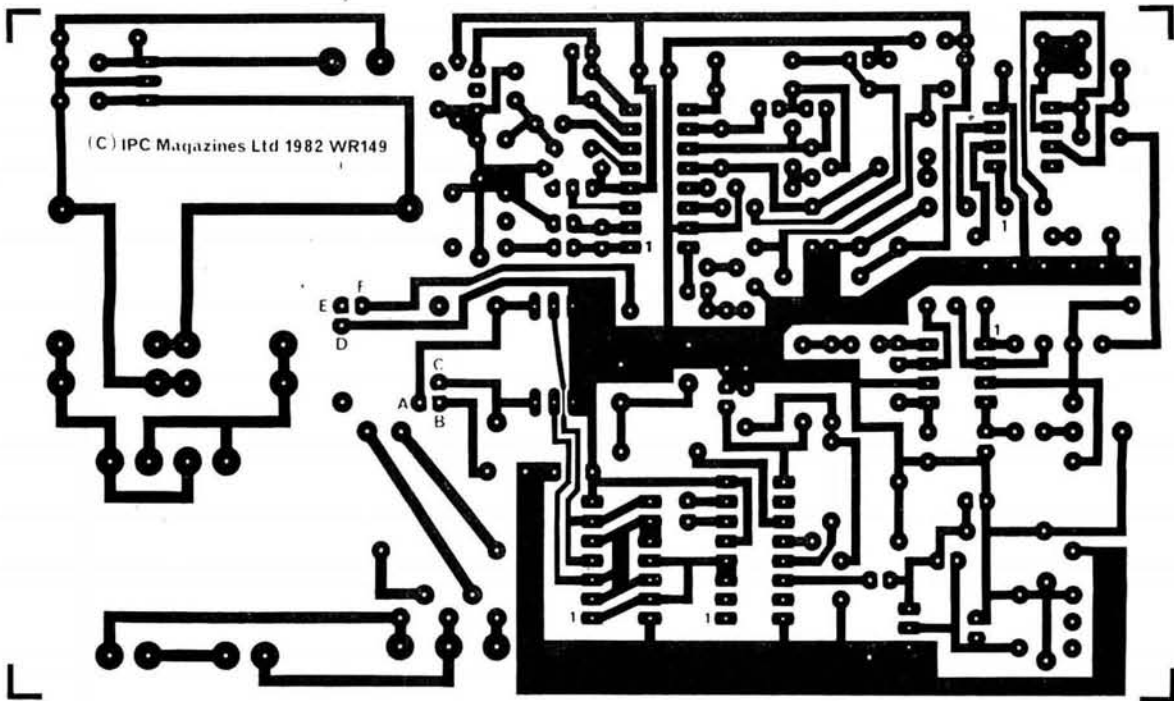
Printed circuit board track pattern, shown full size, plus component layout of a single transceiver module
